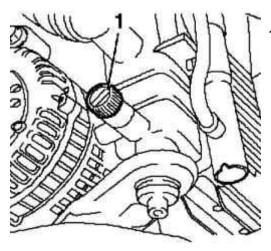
Drainage bolt heatsink: 1 - bolt
